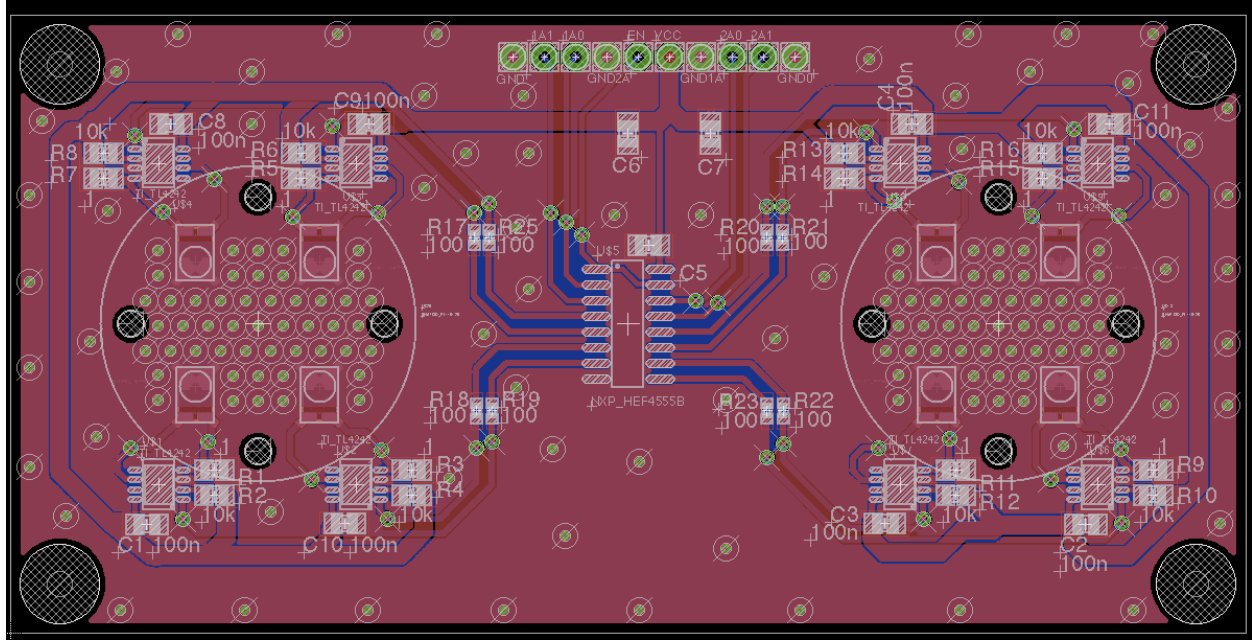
Light Indicator Printed Circuit Board Designed in CadSoft Eagle
